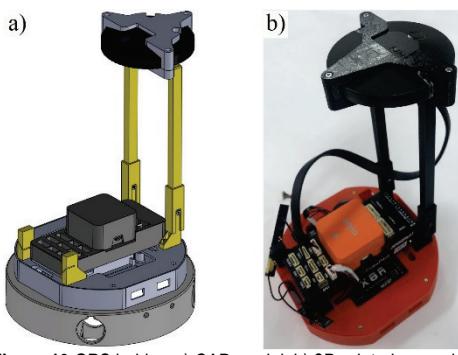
GPS holder: a) CAD model, b) 3D printed assembly
